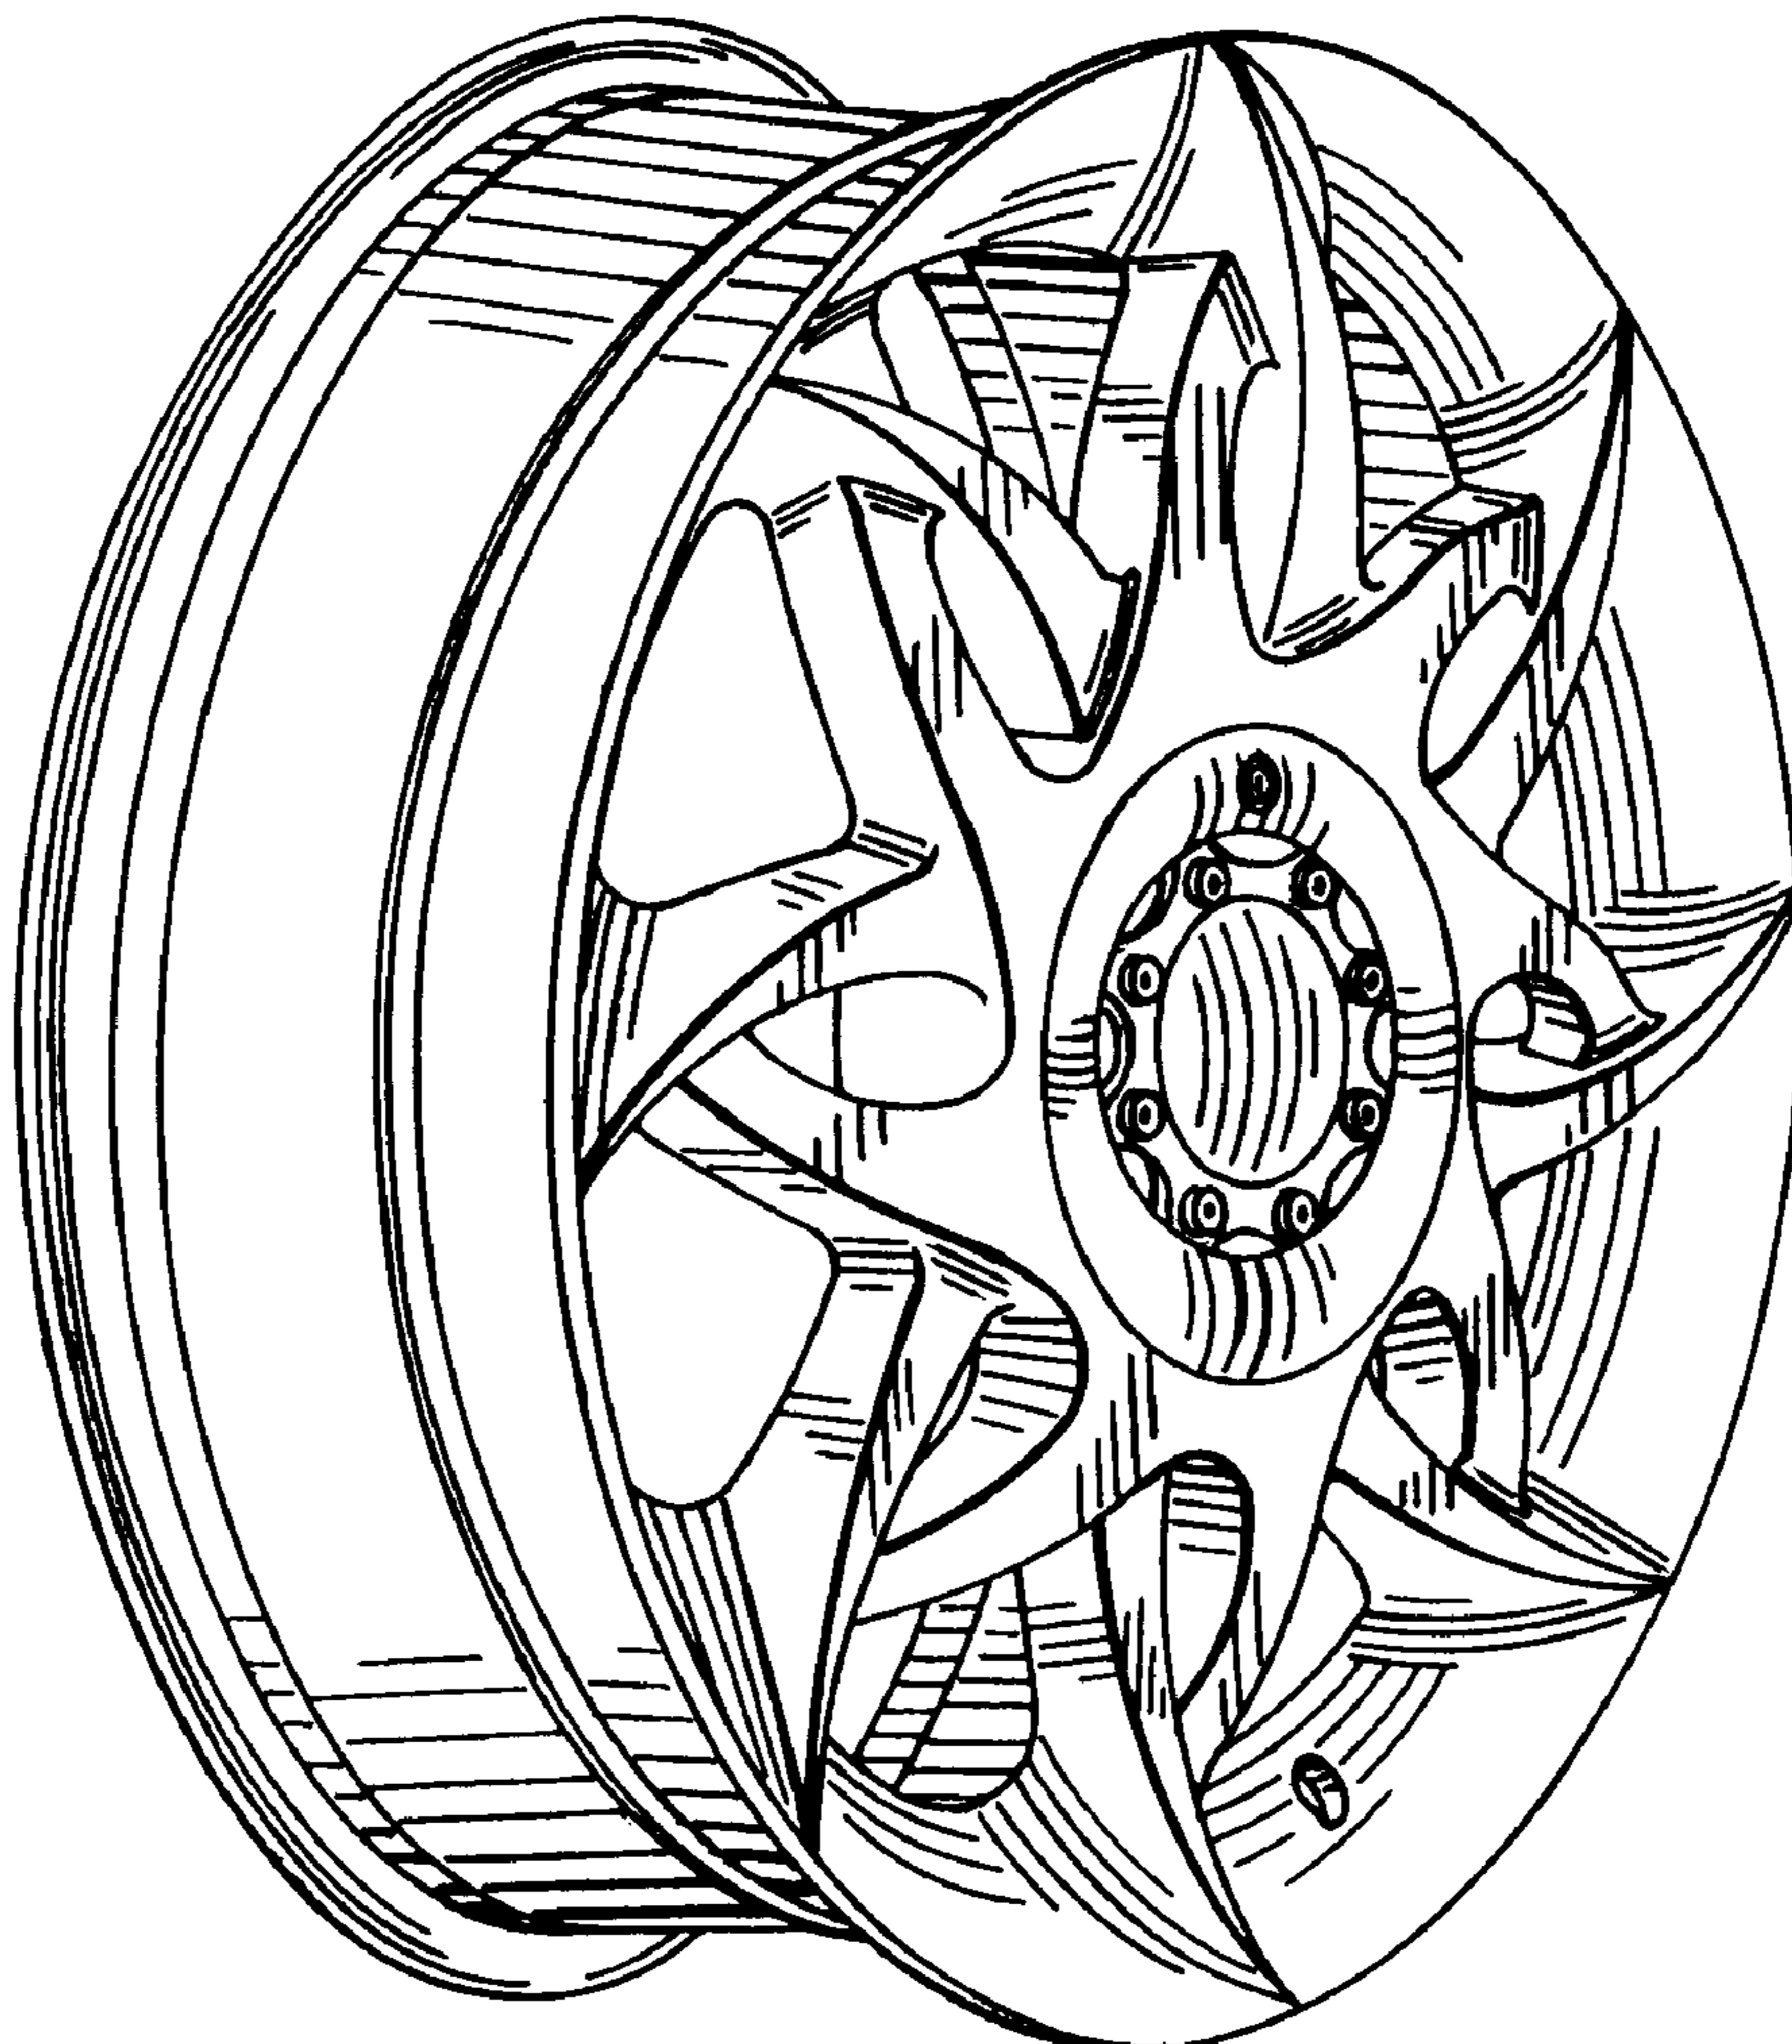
is a perspective view of a vehicle wheel showing my new design;
